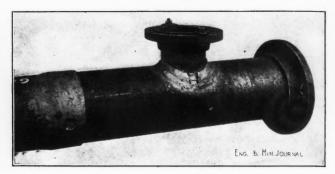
Joint of Two Pipes and Nipple before Welding
